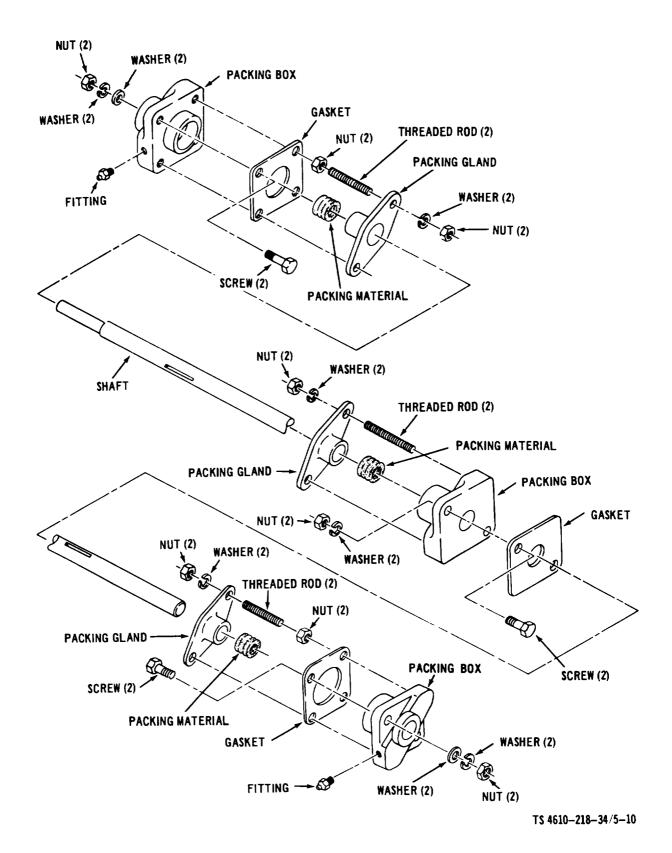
Slurry Feeder Shaft, Seals, and Bearings, Disassembly and Reassembly
